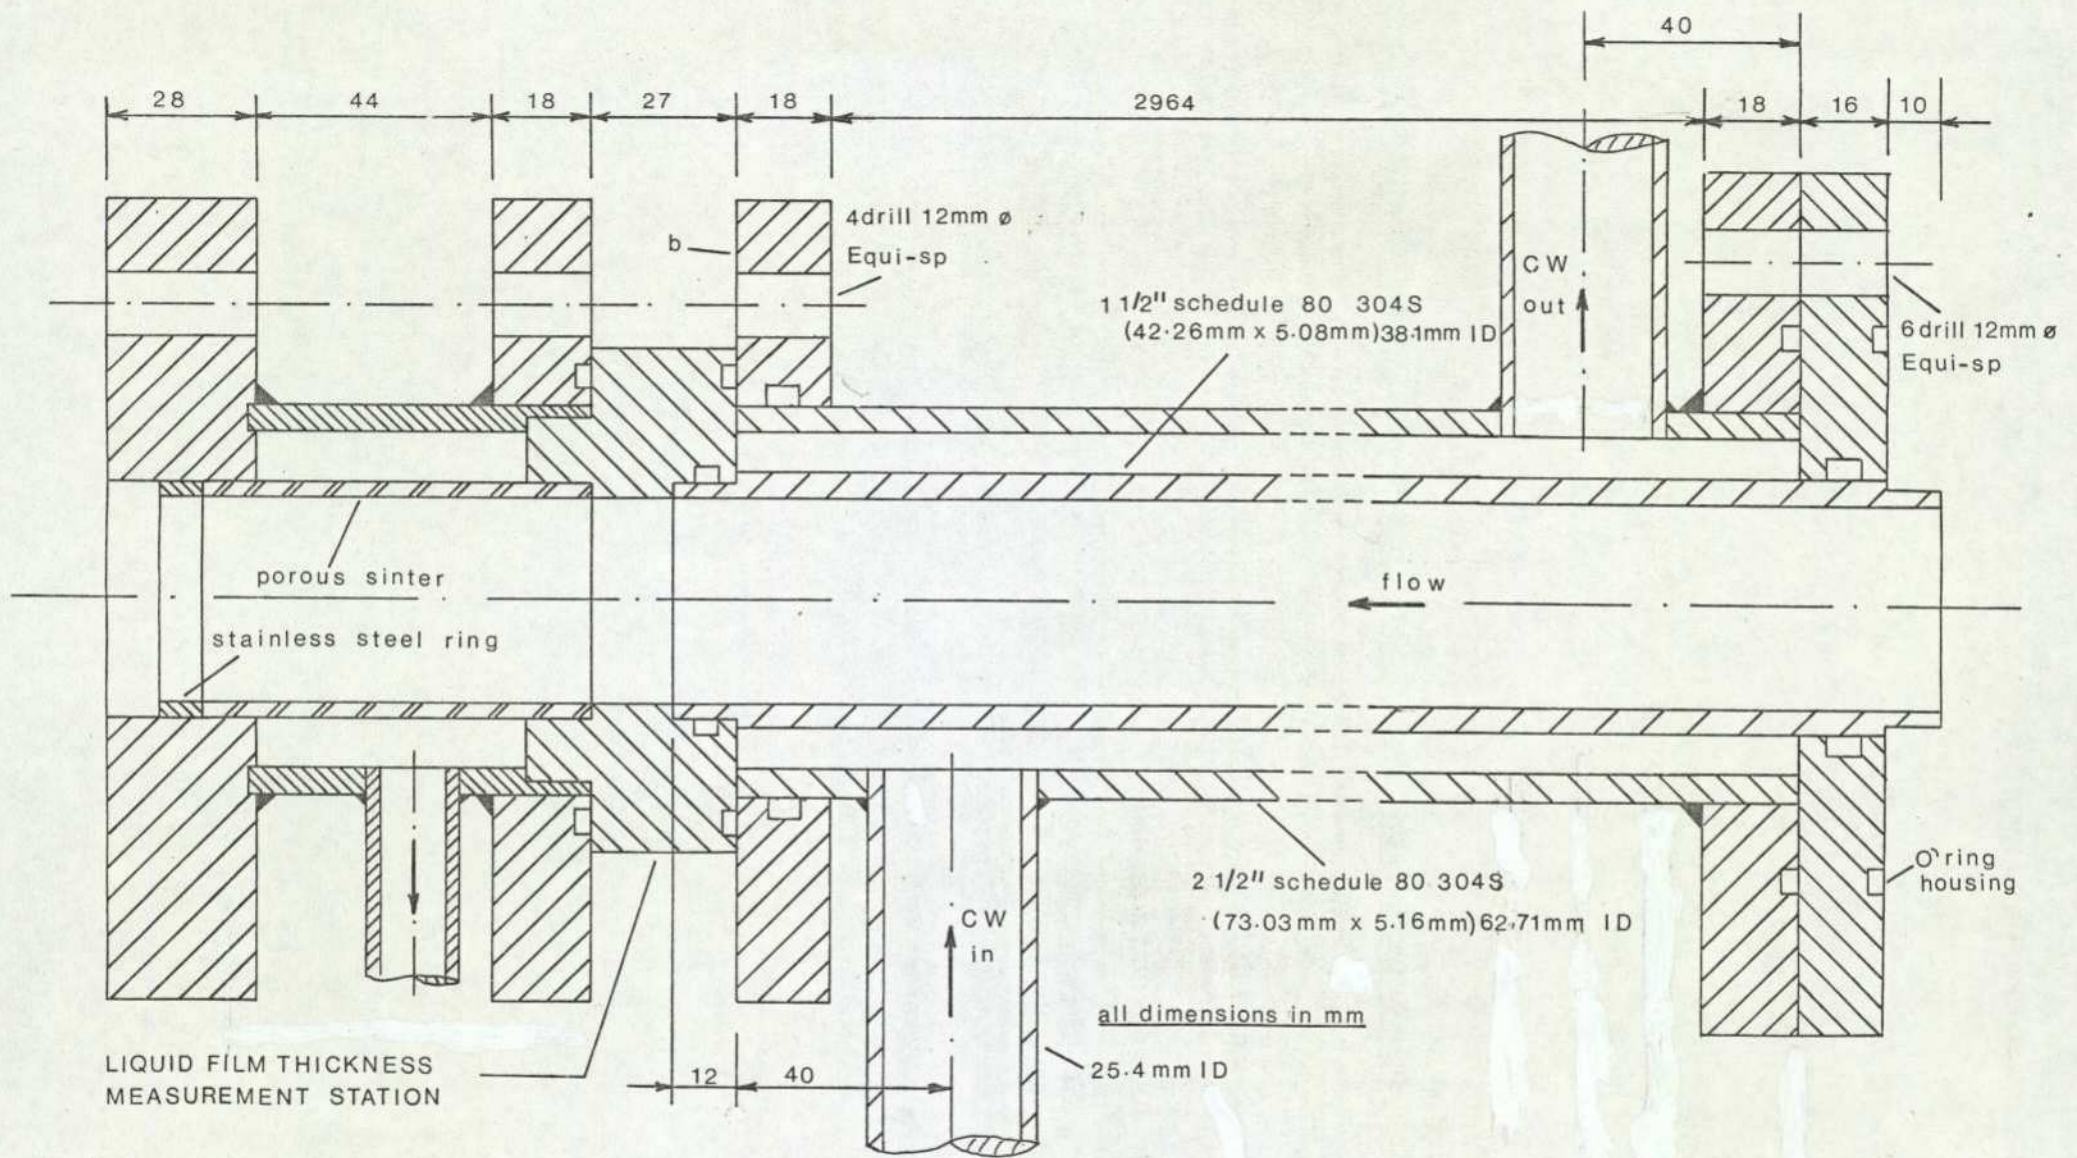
TEST CONDENSER AND FILM REMOVAL UNIT ARRANGEMENT
